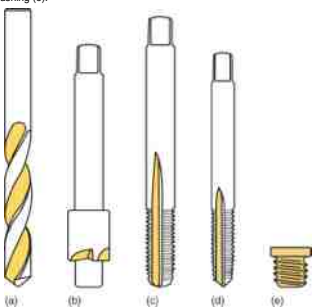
This solid-bushing insert is threaded on the outside, to grip the workpiece. The inner threads match the desired bolt size.
